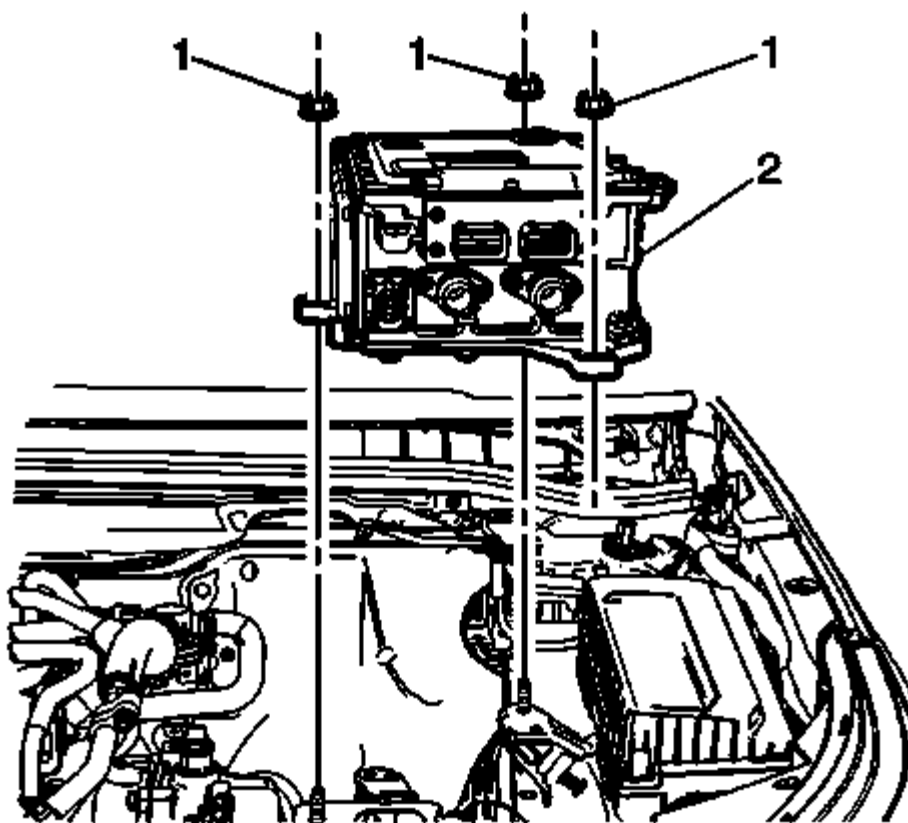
Power Inverter Fasteners And Drive Motor Power Inverter Control Module
